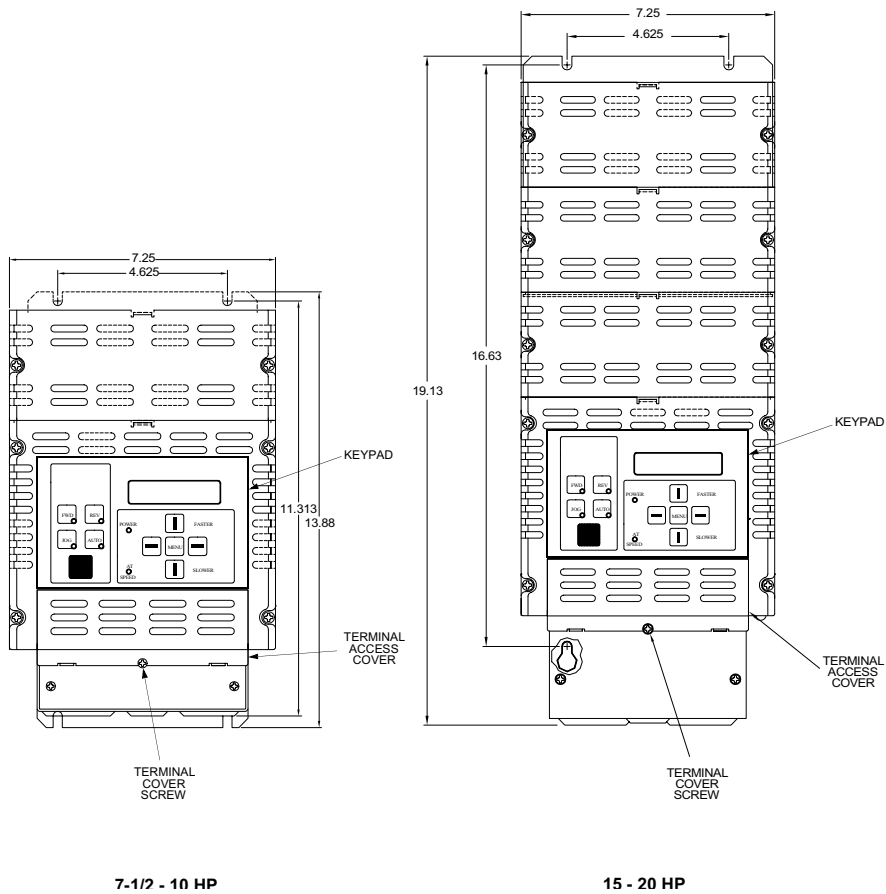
6500 CONTROLLER MOUNTING DIMENSIONS, 7.5 - 20HP, 230/460V
